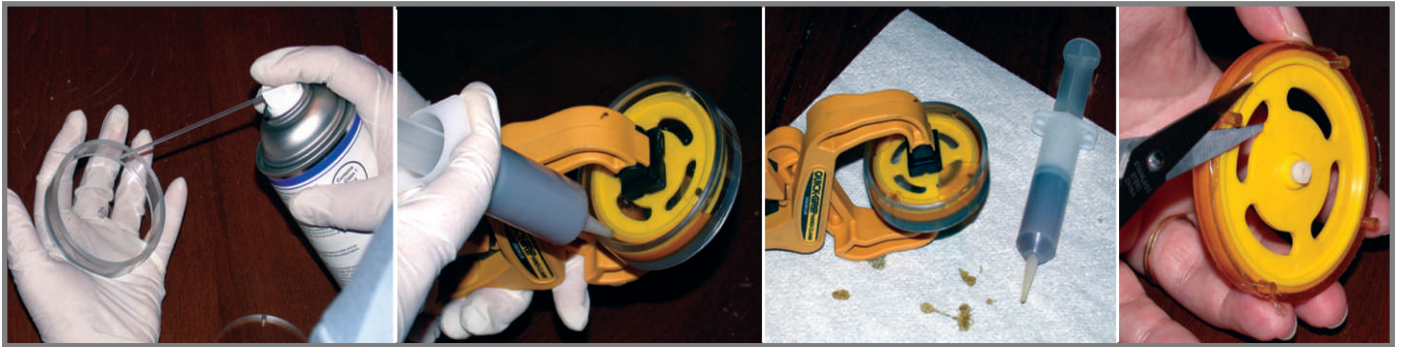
Applying mold release (left), injecting the mold with polyurethane, filled mold, and trimming excess flashing and mold spurs (right).
